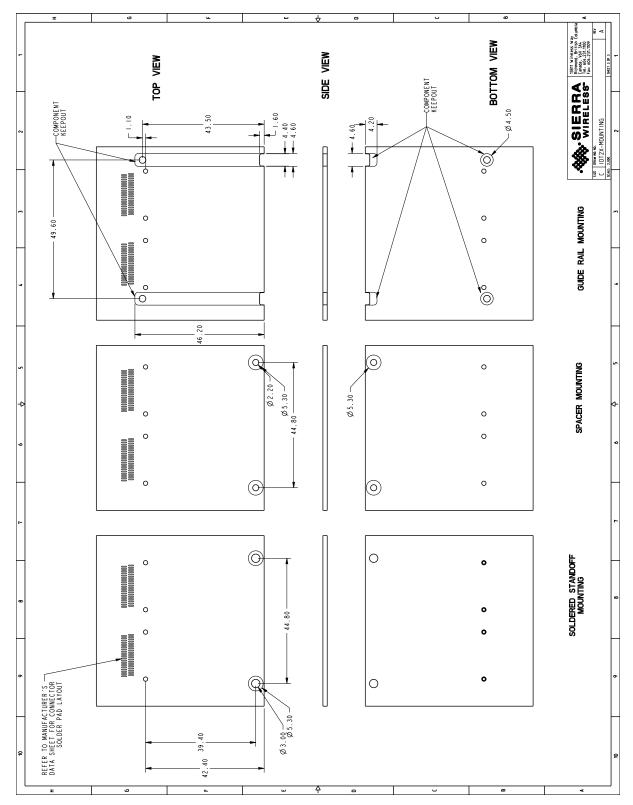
Module-side Mounting Details (Double-width Modules)
